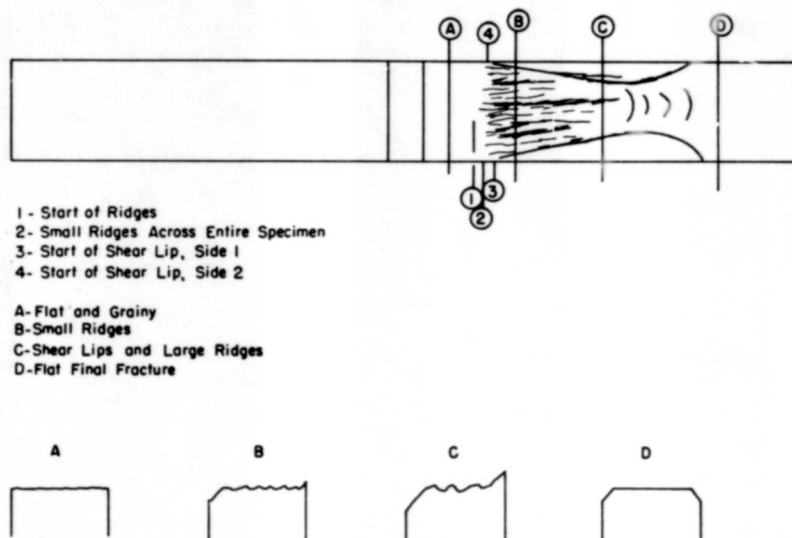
SCHEMATIC DRAWING OF FRACTURE-SURFACE FEATURES OF 1-INCH-THICK SPECIMENS
